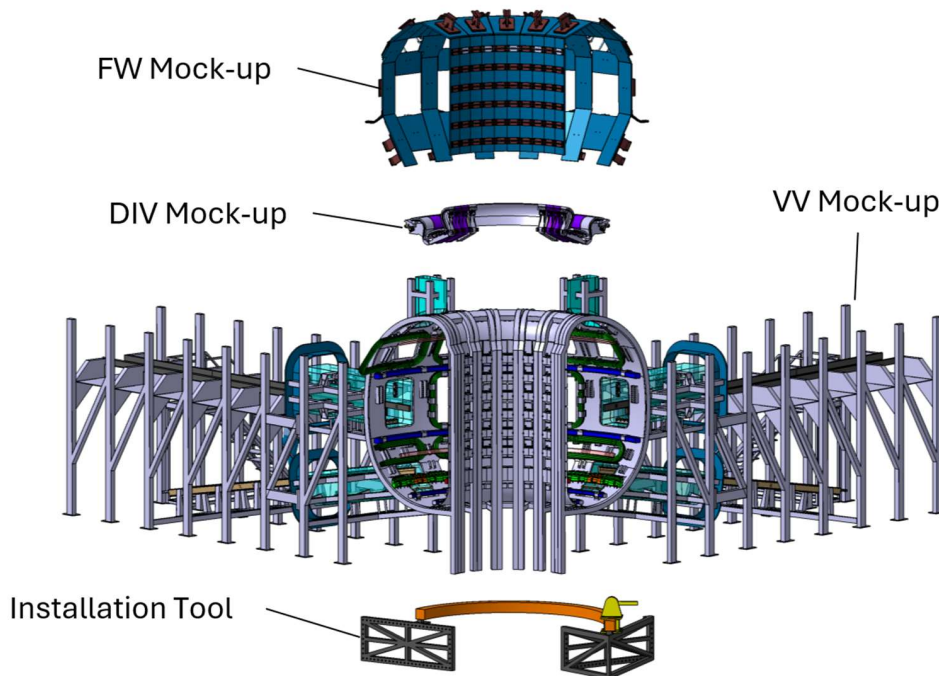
Exploded view of the Mock-ups Concept Design [135]
